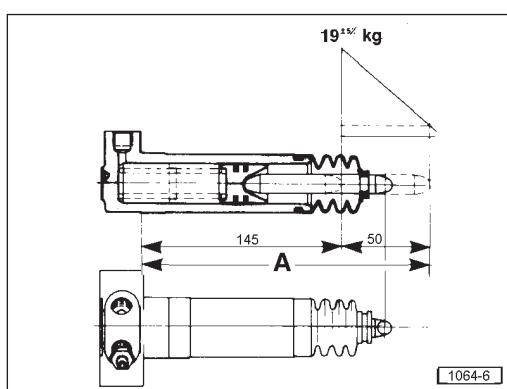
Clutch assembly hydraulic operating cylinder.
